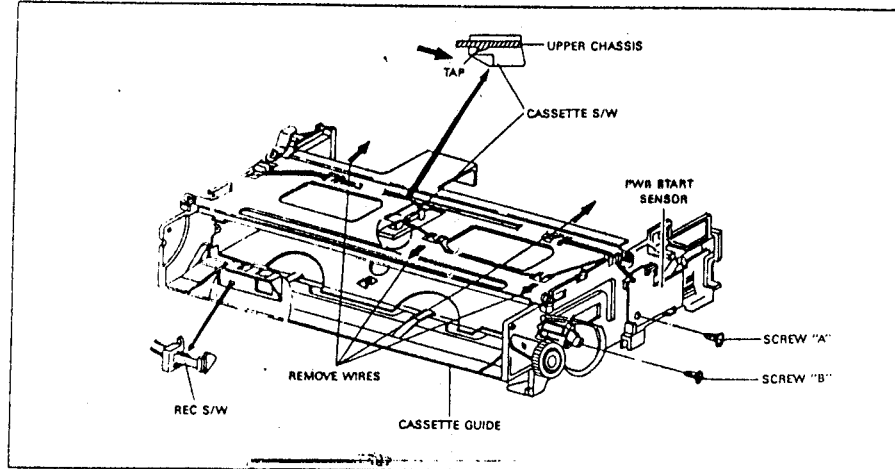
REC S/W / CASSETTE S/W / PWB START SENSOR / Side Arm (R) Removal
